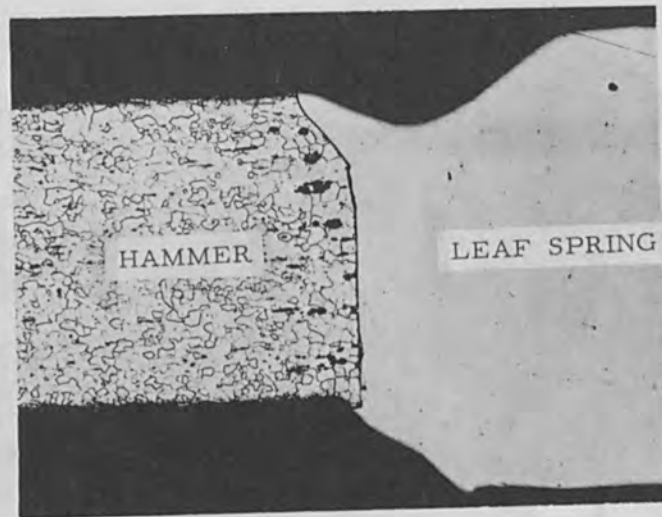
Cross section through spot weld of hammer and leaf spring (magnification 30 x).
